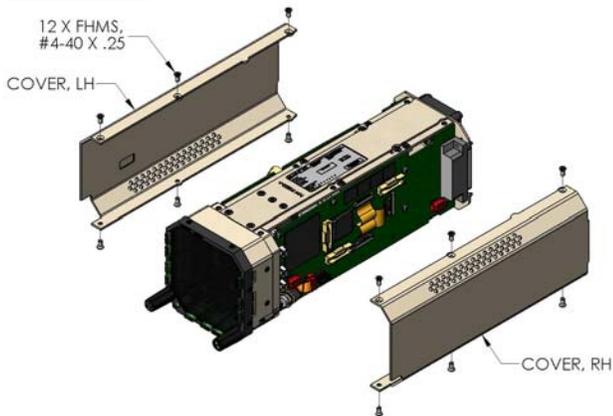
Place SN3500 unit onto a grounded bench area. Remove 12 ea 4-40 X .25 flat head machine screws securing side covers to unit. Remove side covers
